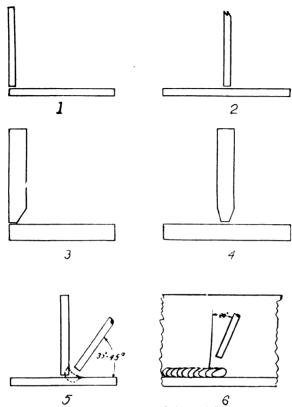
The preparation and arc welding of inside corner and tee weld: 1 Thin metal outside corner weld; 2 Thin metal tee weld; 3 Thick metal inside corner weld; 4 Thick metal tee weld; 5 & 6 Electrode angle for inside corner on tee welds
